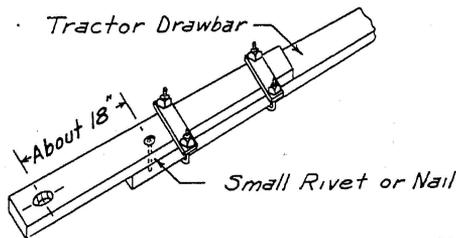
Drawbar extension for tractors with swinging drawbars. The drawbar is swung to the right and locked in position.
